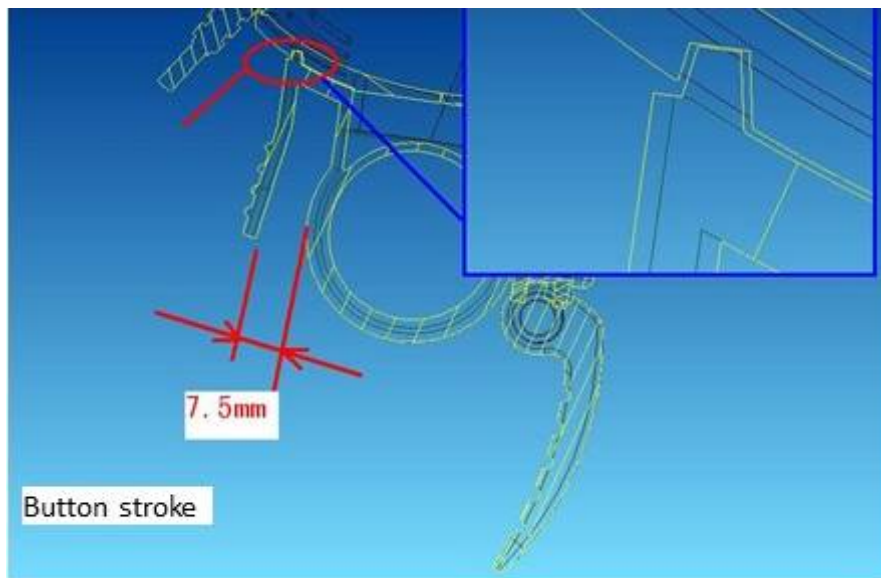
Operating principle and compression button dimensional design of rear-activated clip mounting bracket.
